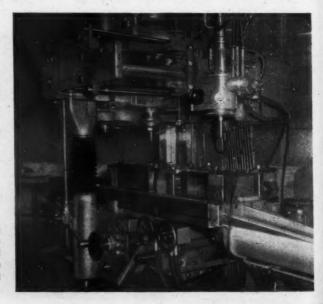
The building of die casting and injection moulding machines by the company has led to the establishment of a die-making tool-room in the factory. The plant includes this Rigid hydraulic copy die-sinking machine
